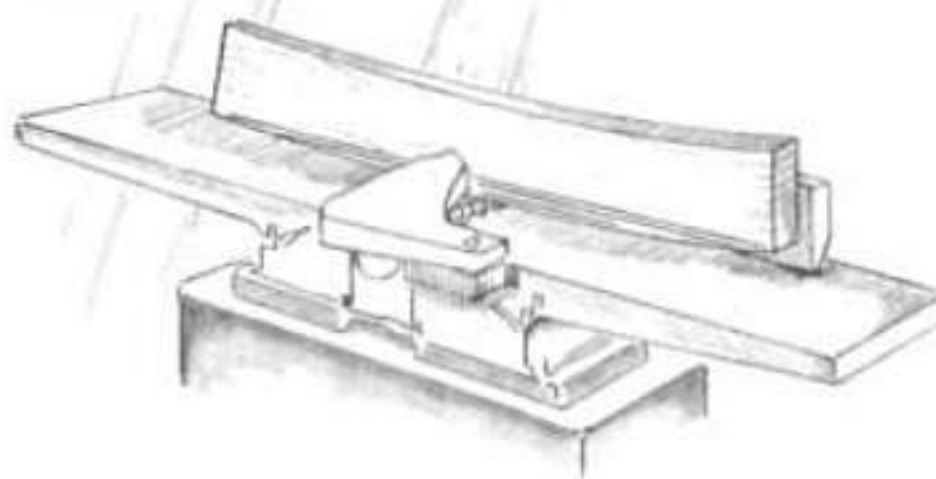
STRAIGHTENING BOWED EDGES (DEFECTS EXAGGERATED)
